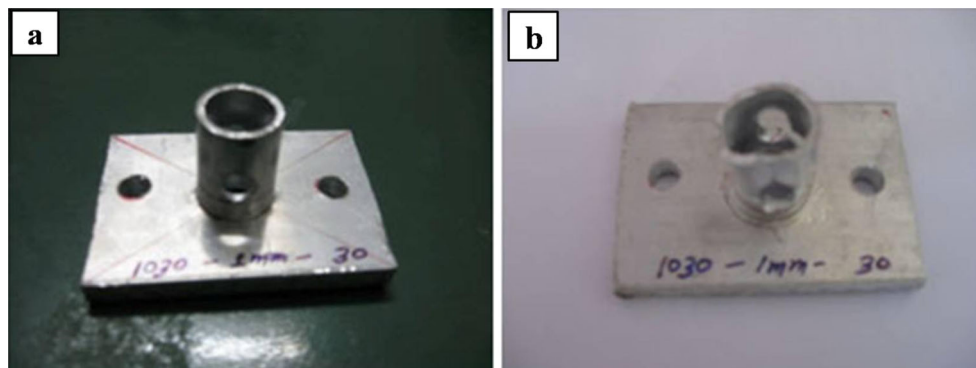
a Pull test sample. b Fractured pull test sample
